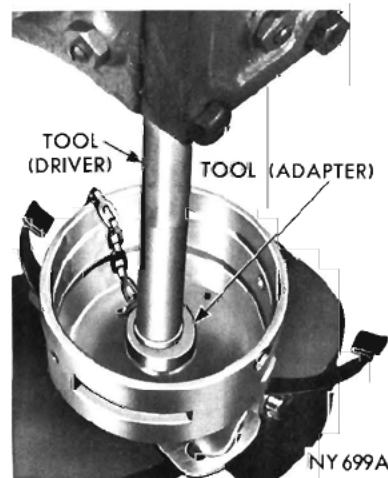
Installing Distributor Housing Upper Bushing (Typical)
